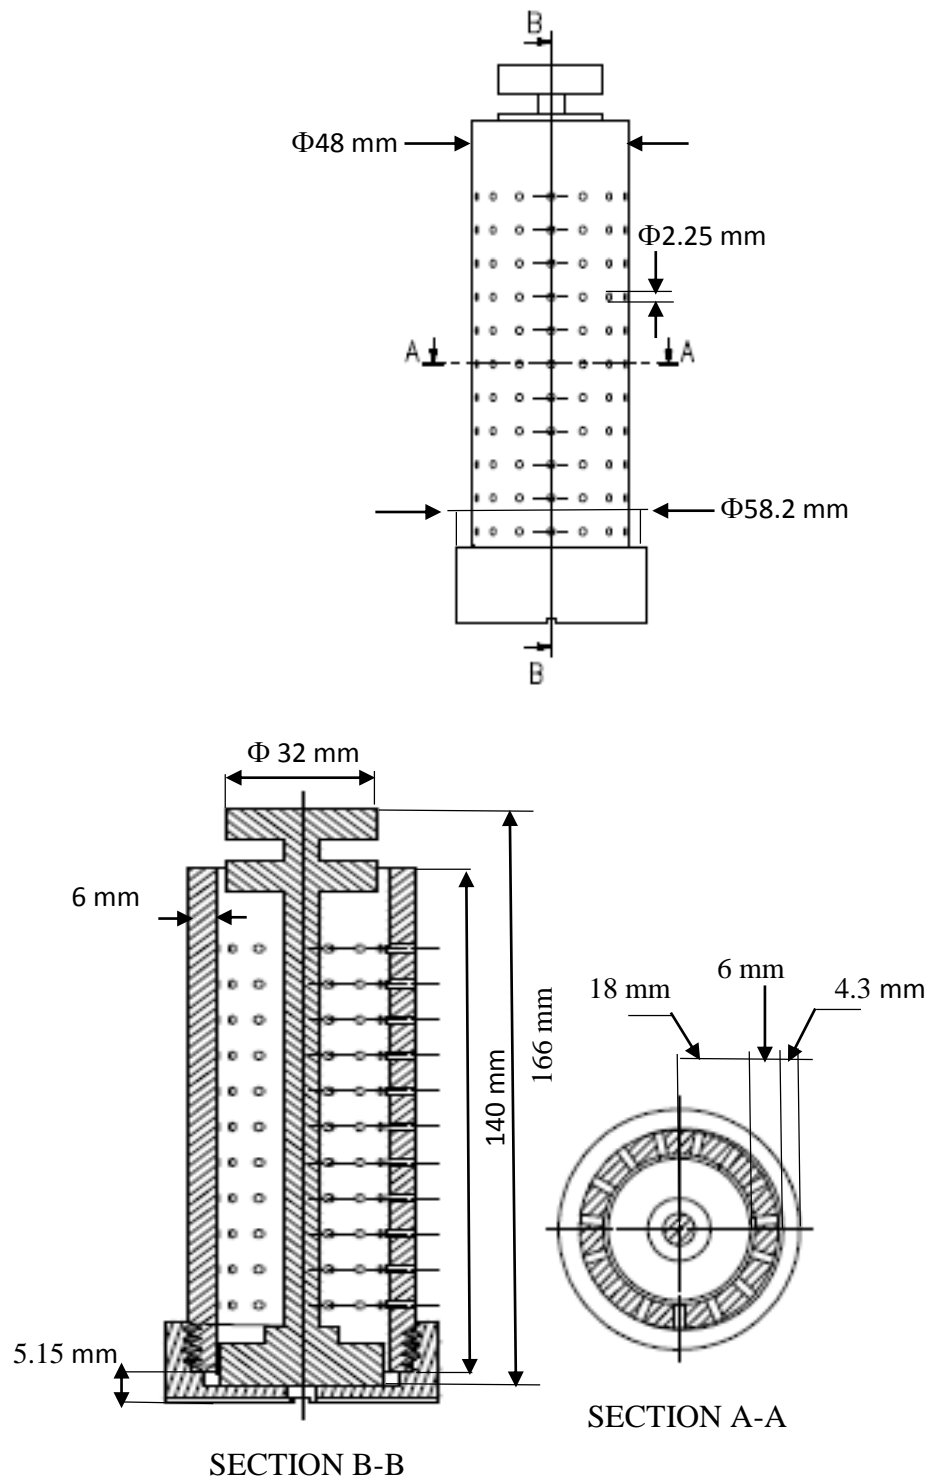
Drawing and sections of final molds with rod having rigid circular plates
